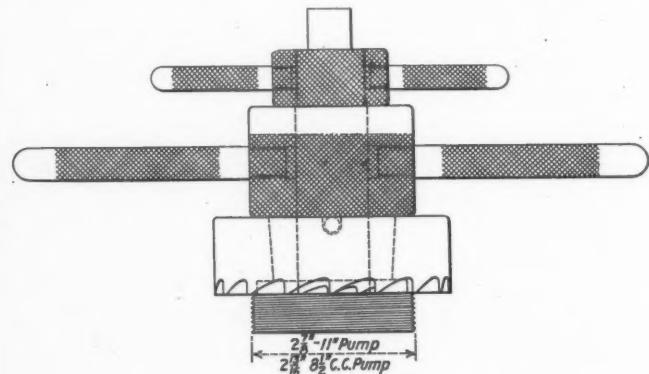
Assembly drawing of a tool for refacing the reversing valve cap joint
